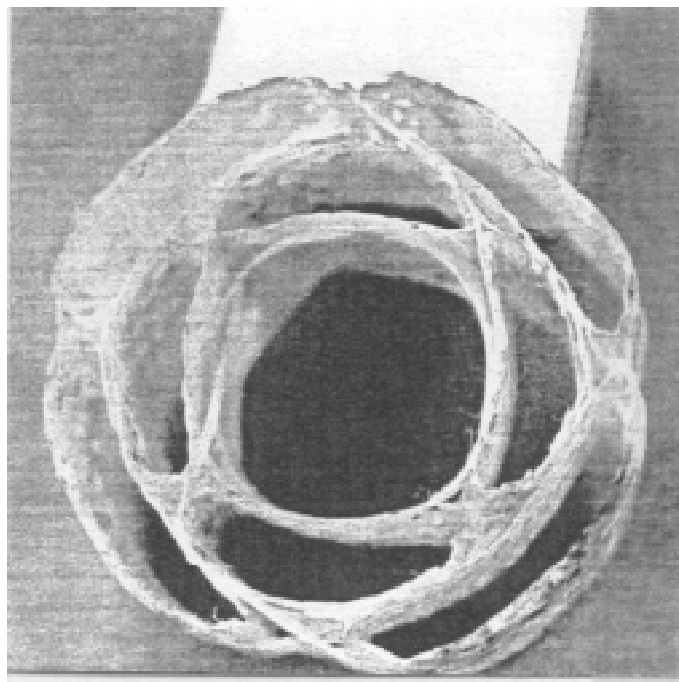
Photograph of a cross-section of a cylindrical braided composite without core materials
